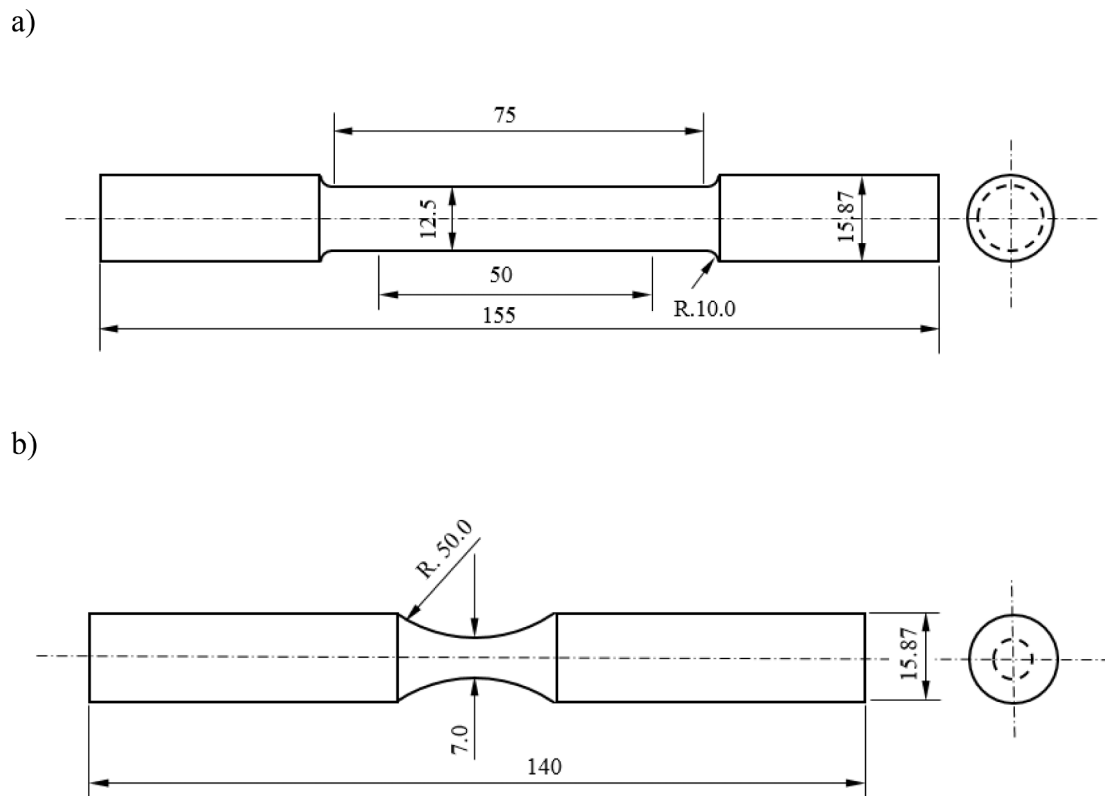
a) tension test specimen and b) uniaxial fatigue test specimen. Dimensions are expressed in millimeters.
